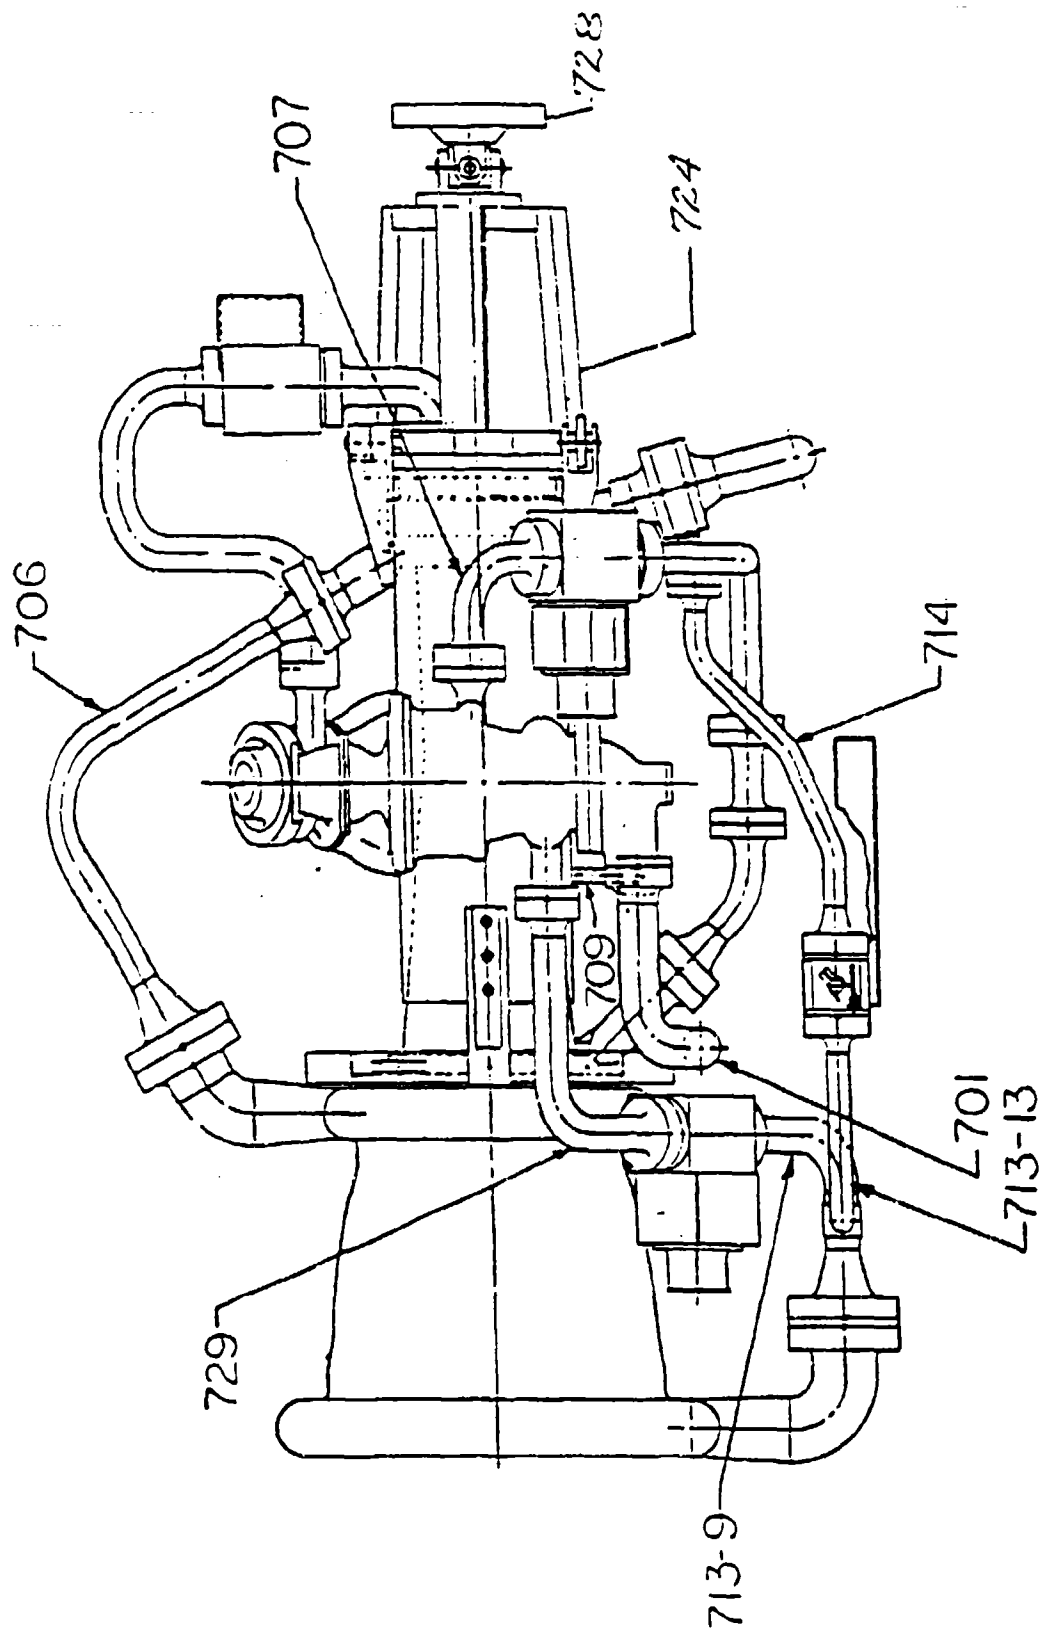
ICE THRUST CHAMBER ASSEMBLY
